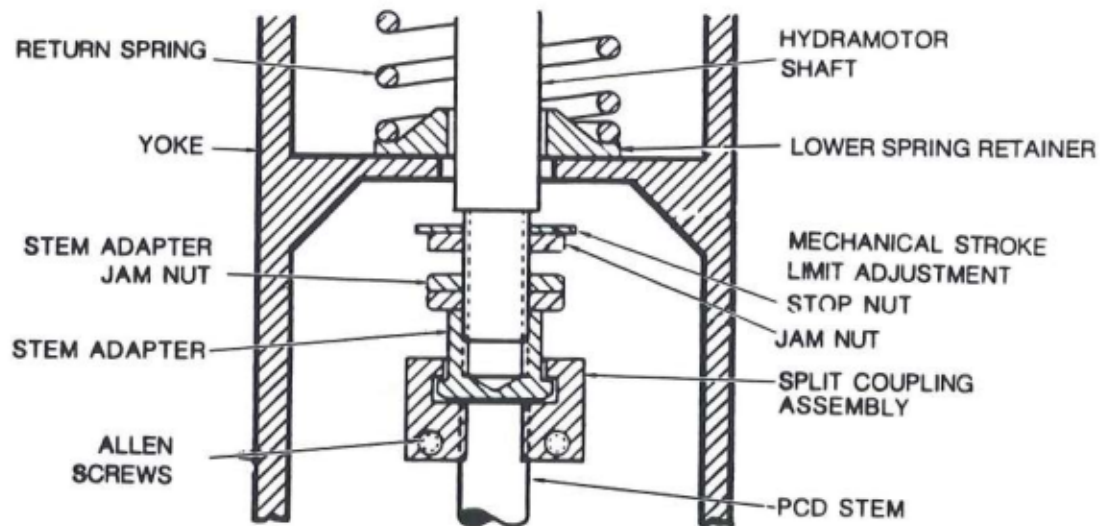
Shaft/PCD Stem Connection for Push Type Hydramotors
